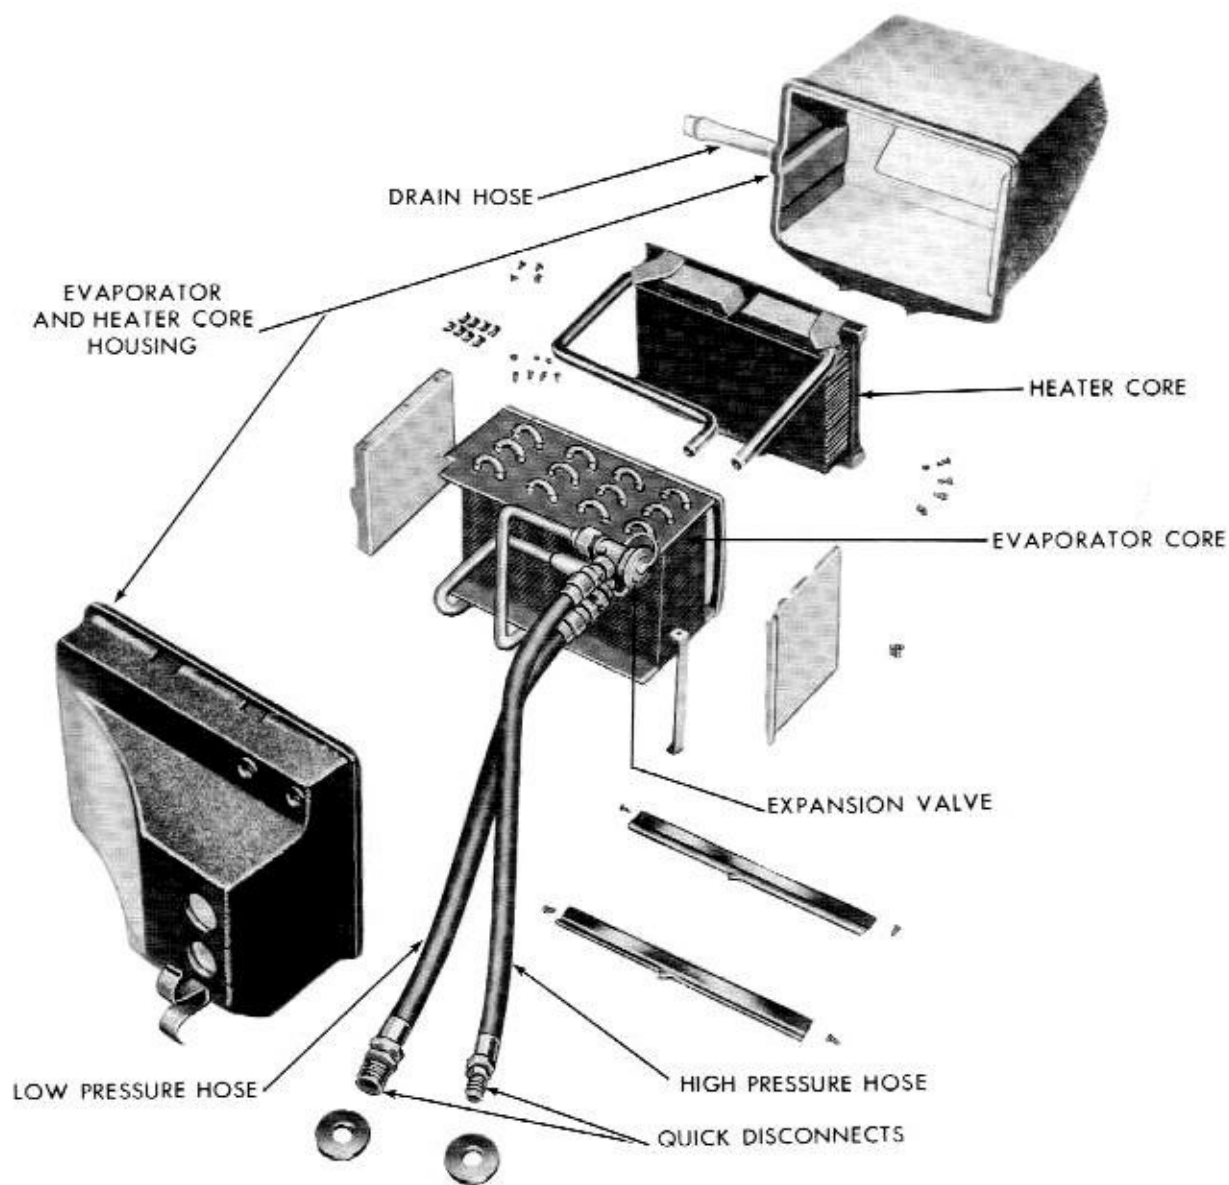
Evaporator Assembly Disassembled—(60L-8808)
